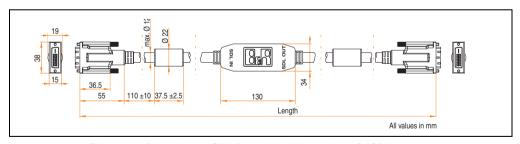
Dimensions - SDL flex cable with extender 5CASDL.0x00-13
